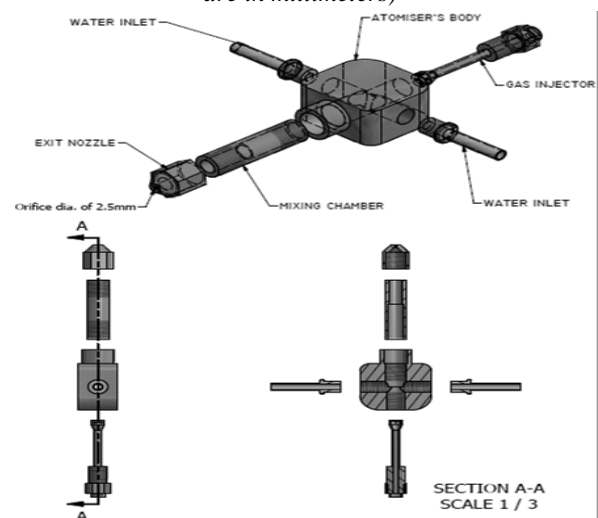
Exploded view of the Assembled Fabricated twin fluid nozzle (all dimensions are in millimeters)
